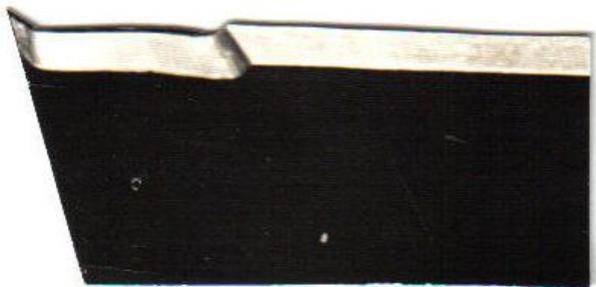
Photography of the cutting-off tool after finishing the operation with plastic zone on the face
